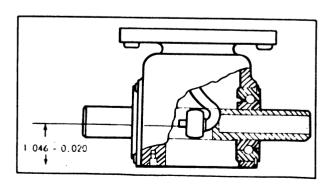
Gunner's control disassembly or assembly (2 of 6).
